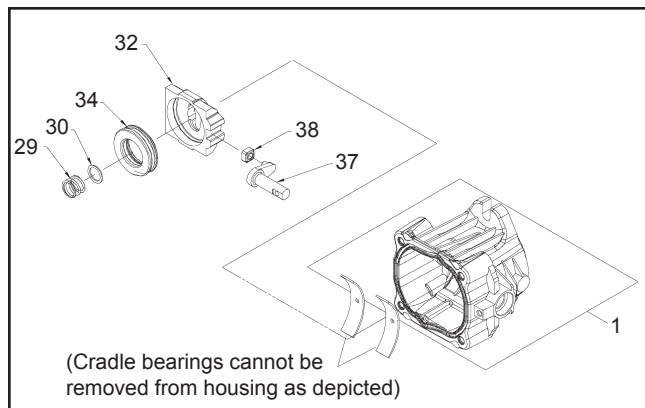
PG / PE Pump Swashplate and Cradle Bearings
